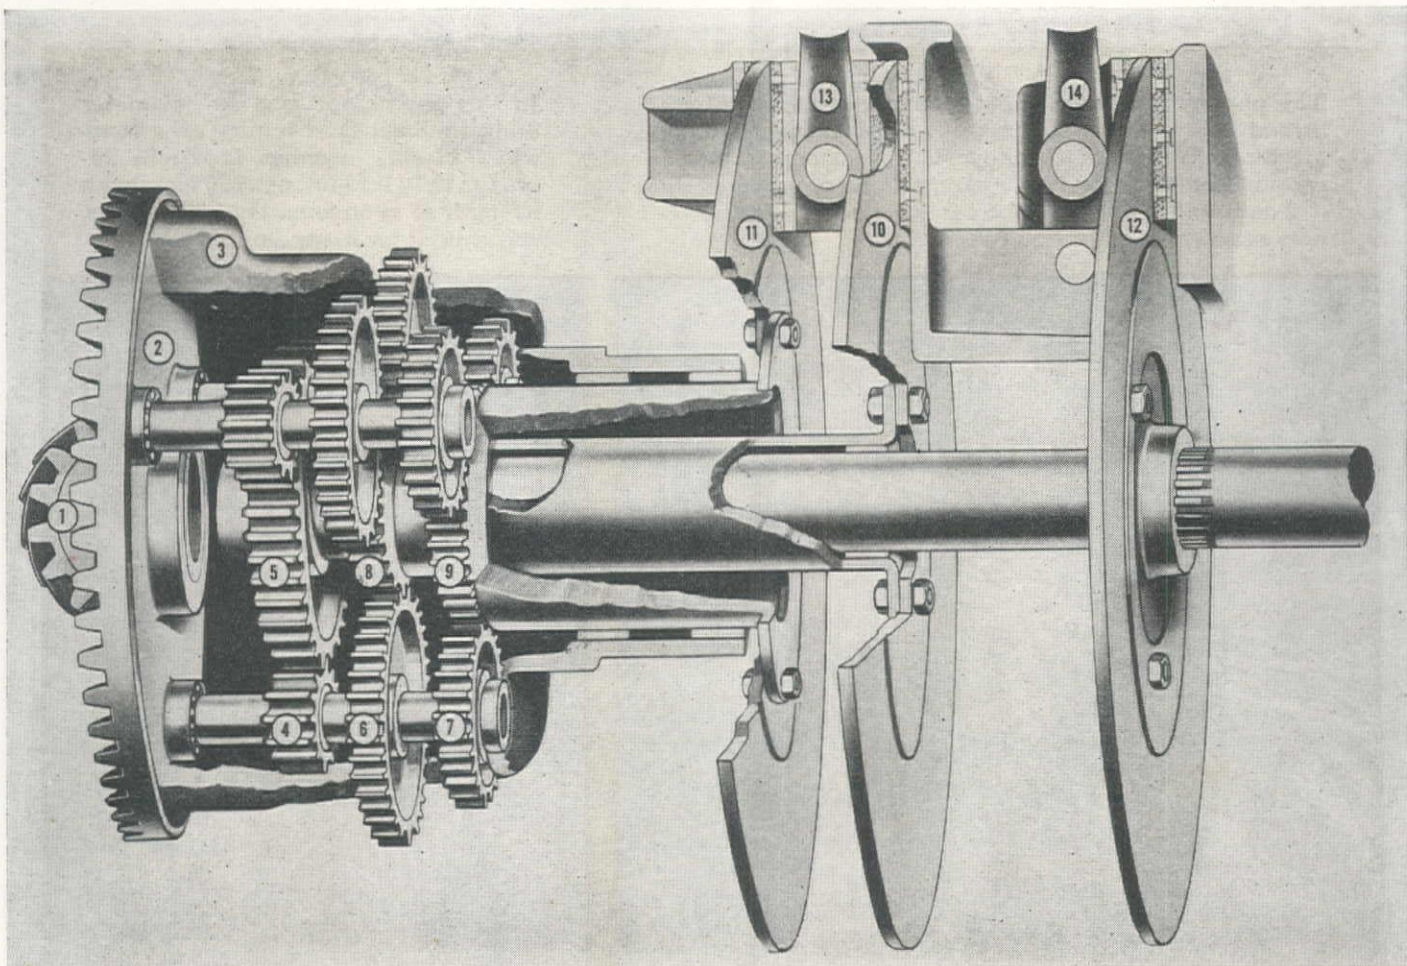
FIGURE B—Exploded rear view of the TD-24 planet power final drive assembly.
